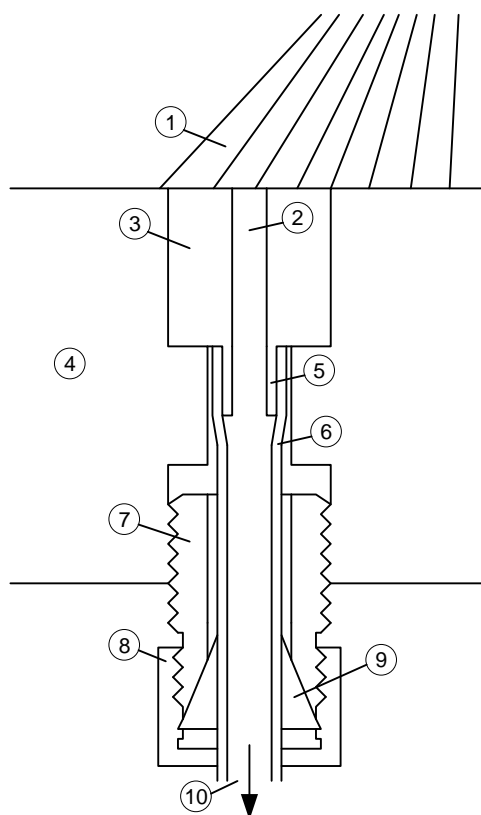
Diagram of the exit orifice assembly: (1) Brush; (2) Exit orifice; (3) Exchangeable brass piece; (4) Feeder base; (5) Machined nipple; (6) Flexible outlet tube; (7) Swagelok fitting; (8) Swagelok nut; (9) Swagelok ferrule; (10) Particle and gas exit.
